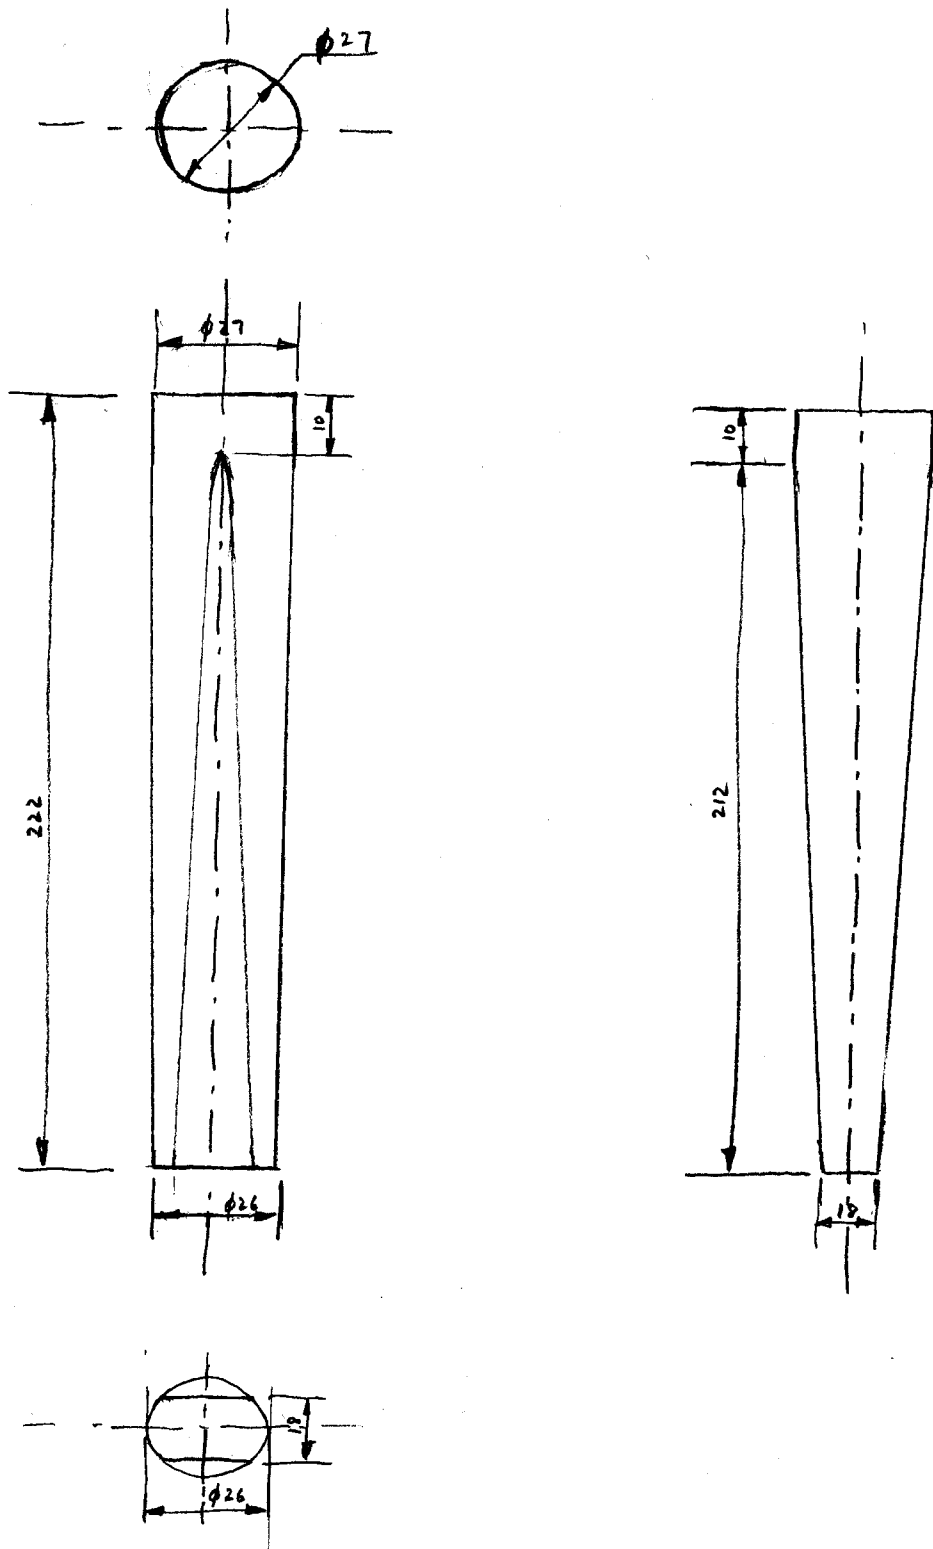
Mandrel for manufacture of Aluminium SEN inside
